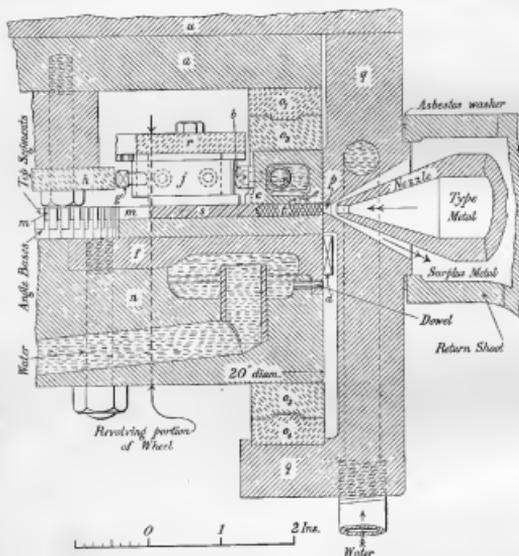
Wicks rotary typecaster; section through mould at casting point.
